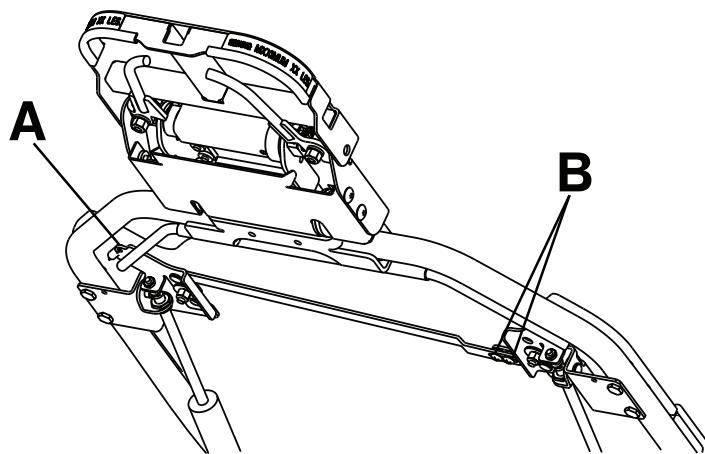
5051 Pneumatic Fowler backrest release handle adjustment
